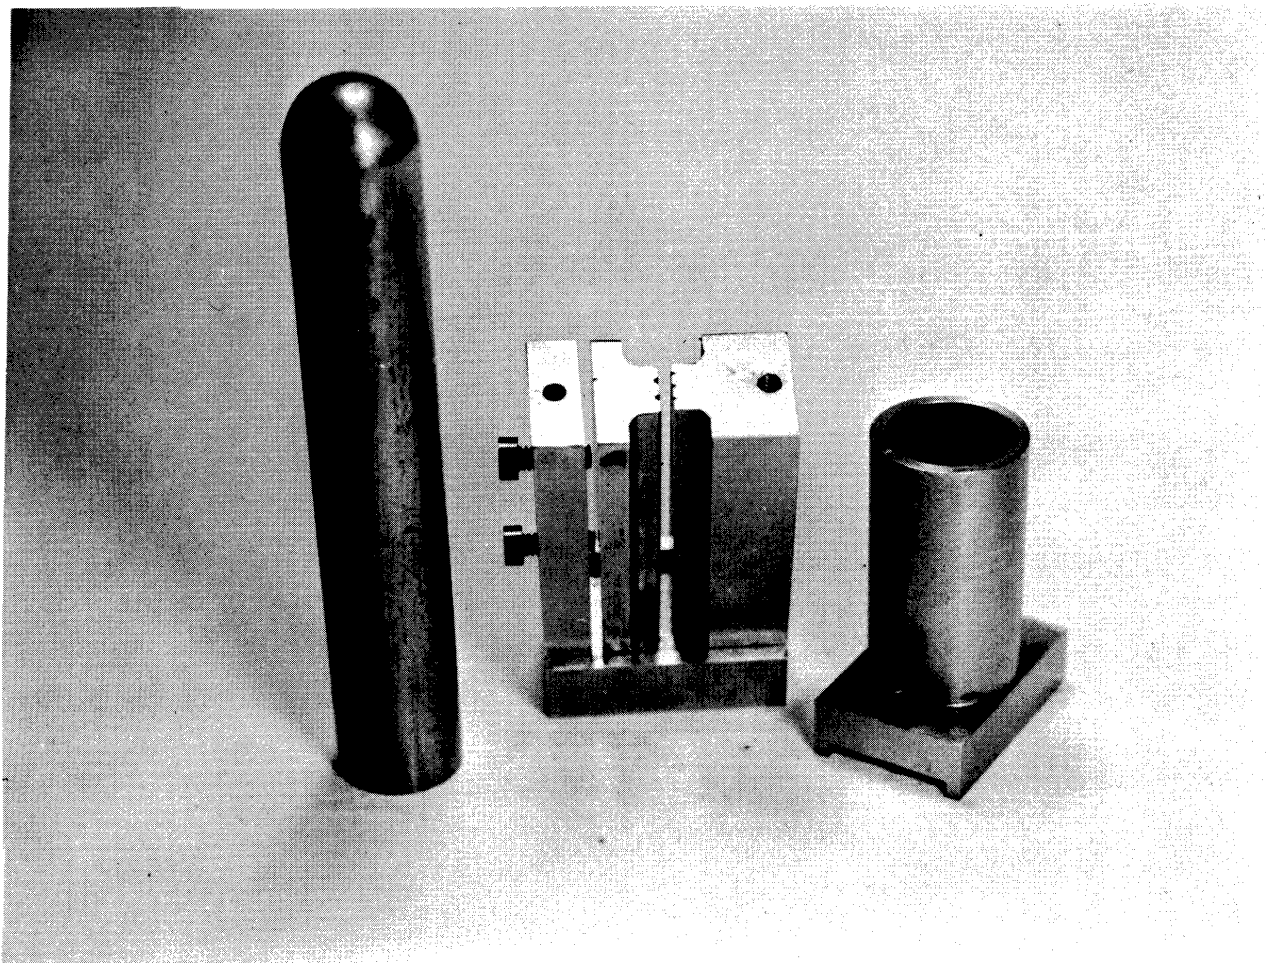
Revised compression fixture showing off-set grooves in guide blocks.
